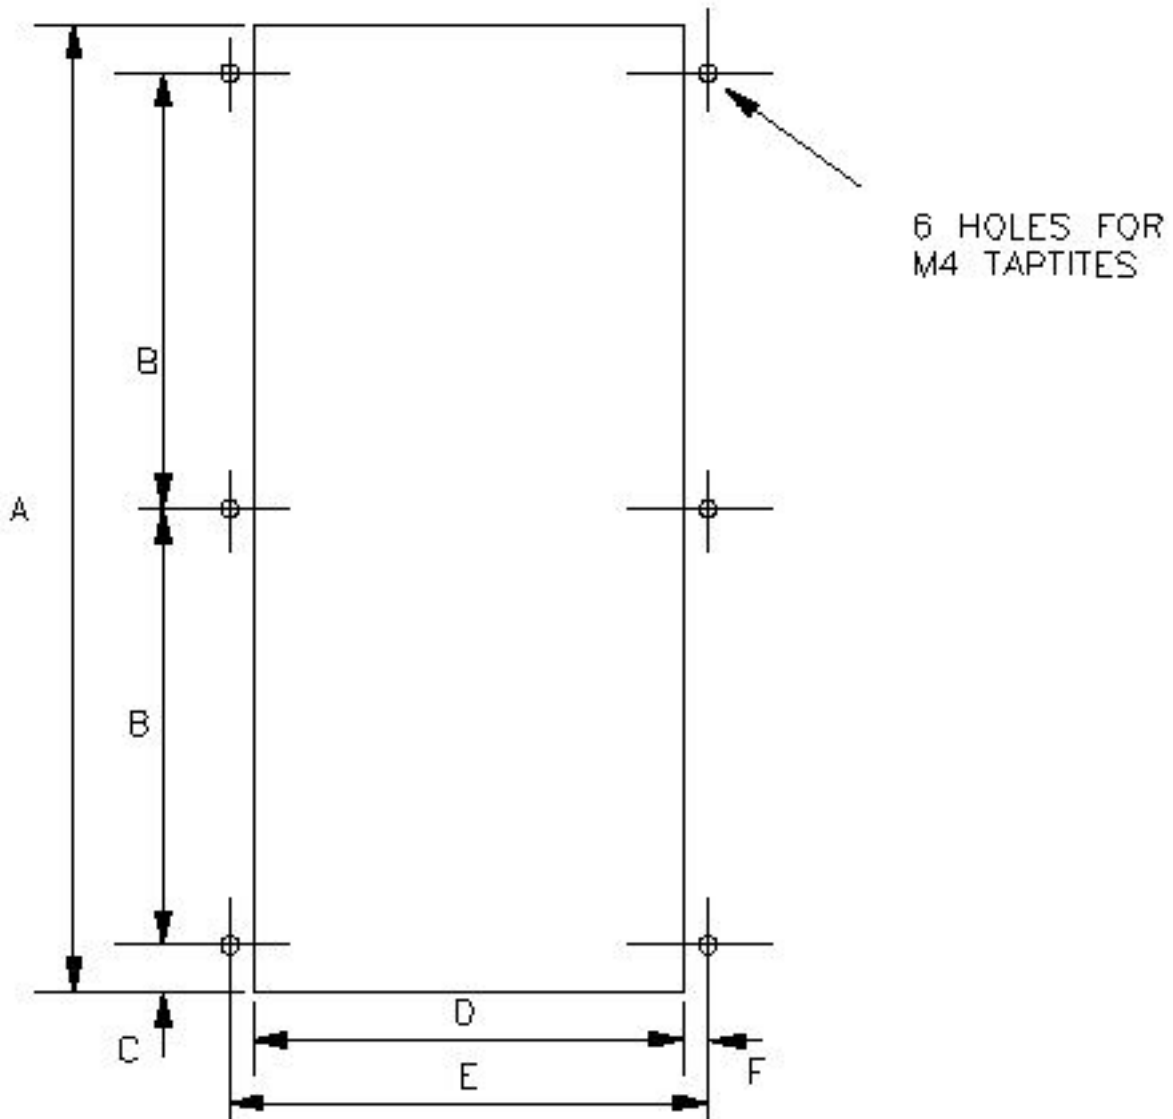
Fixing Centres on DELTA Cooling System for Ducting the Outlet
